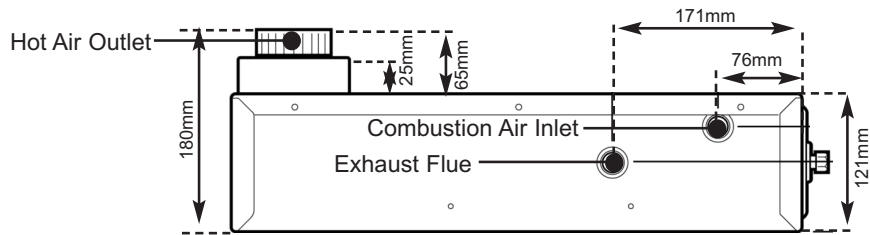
External (Underfloor) Installation - Side View - SH2211 / SC2211
